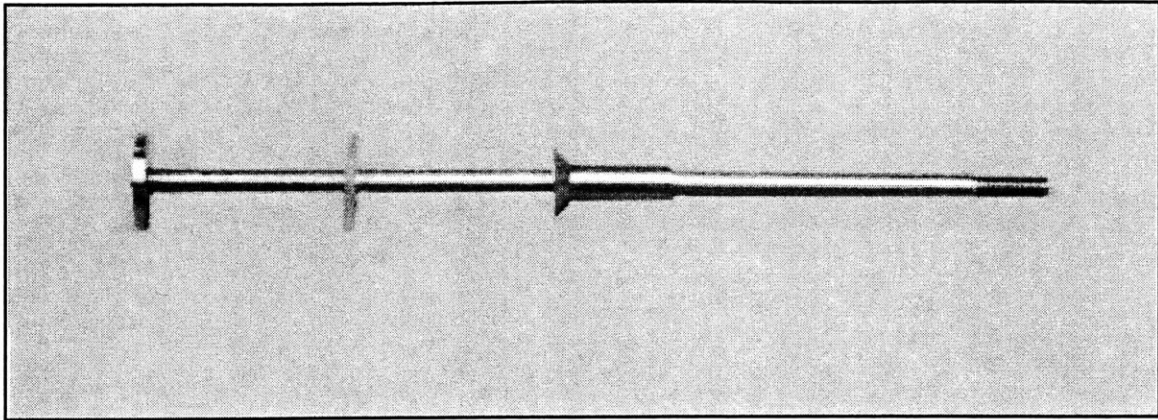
Photograph of Head, Stem, Seat and Seat Clamp
